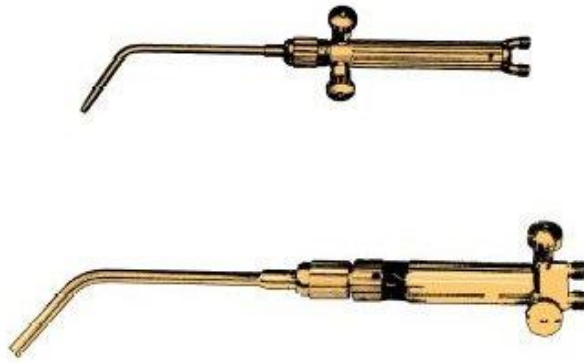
Welding torches of this general design are by far the most widely used. They will handle any oxy- acetylene welding job, can be fitted with multiflame heads for heating applications, and accommodate cutting attachments that will cut steel 6 in. thick. Fig 1-5. Cutting attachment for use on the welding torch shown immediately above.
